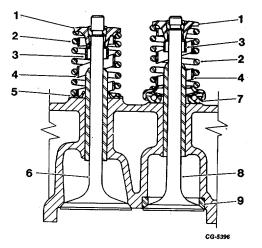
Cross Section of Intake and Exhaust Valves Installed in Head
